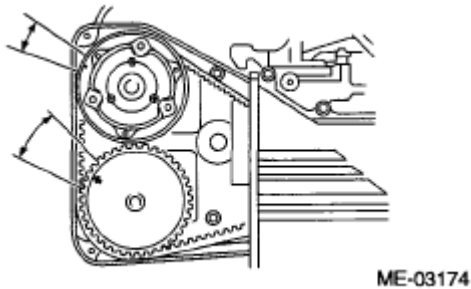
Identifying Clearance Of No. 1 Cylinder Exhaust Valve And No. 4 Cylinder Intake Valve
